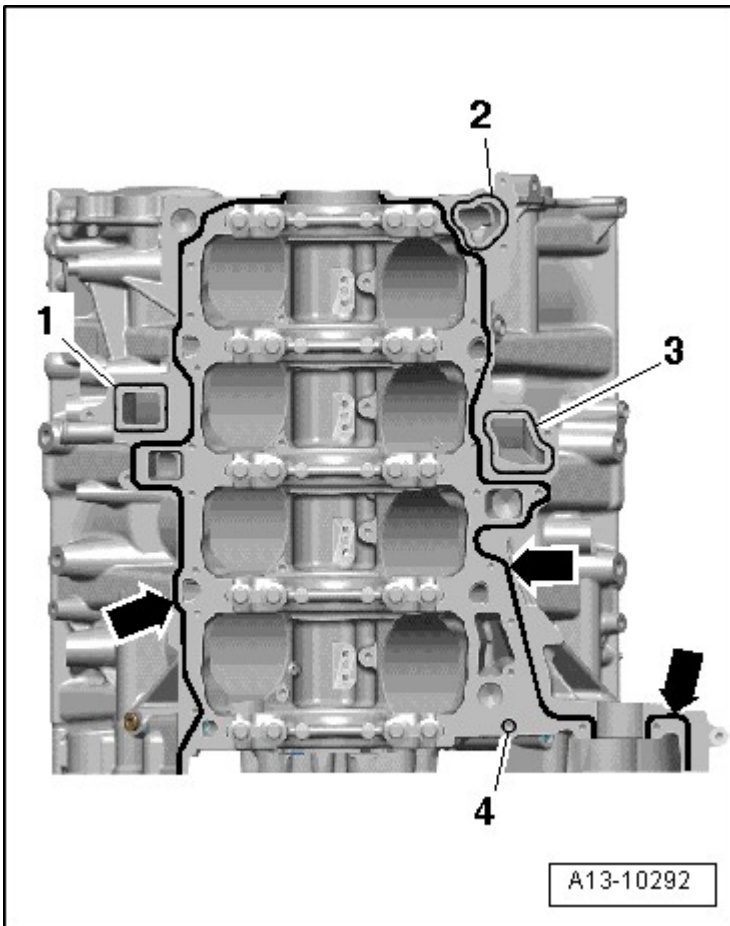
Identifying Sealant Applied On Cylinder Block (For Guide Frame)
